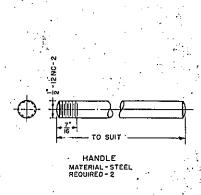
Lapping Tool for Valve Cover Gasket Surfaces
